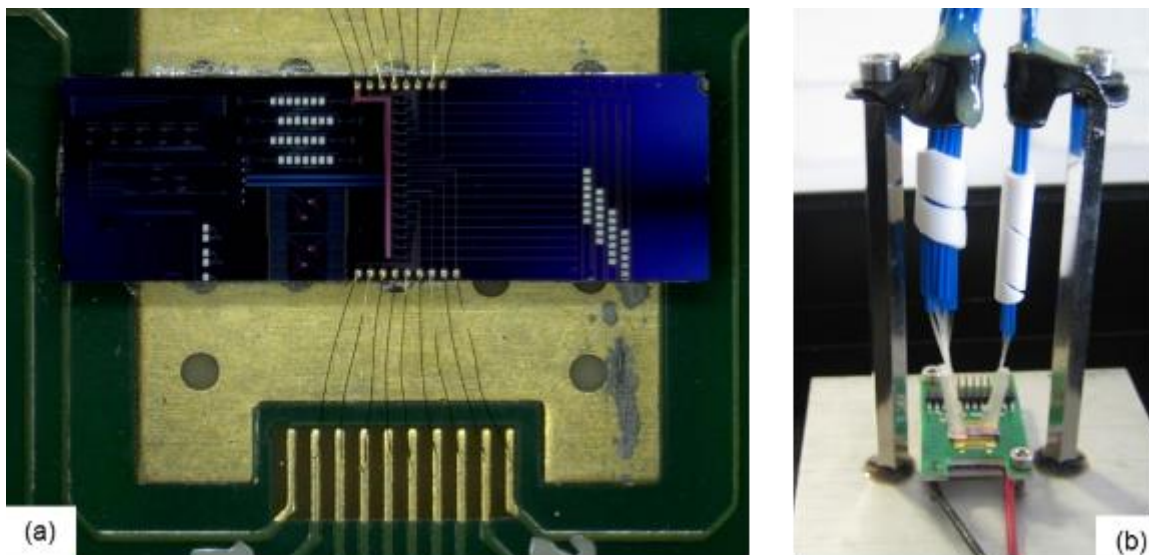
(a) The fabricated run 2 CBC chip with electrical contacts wire-bonded to the PCB host board. (b) Photograph of the optically packaged run 2 device.
